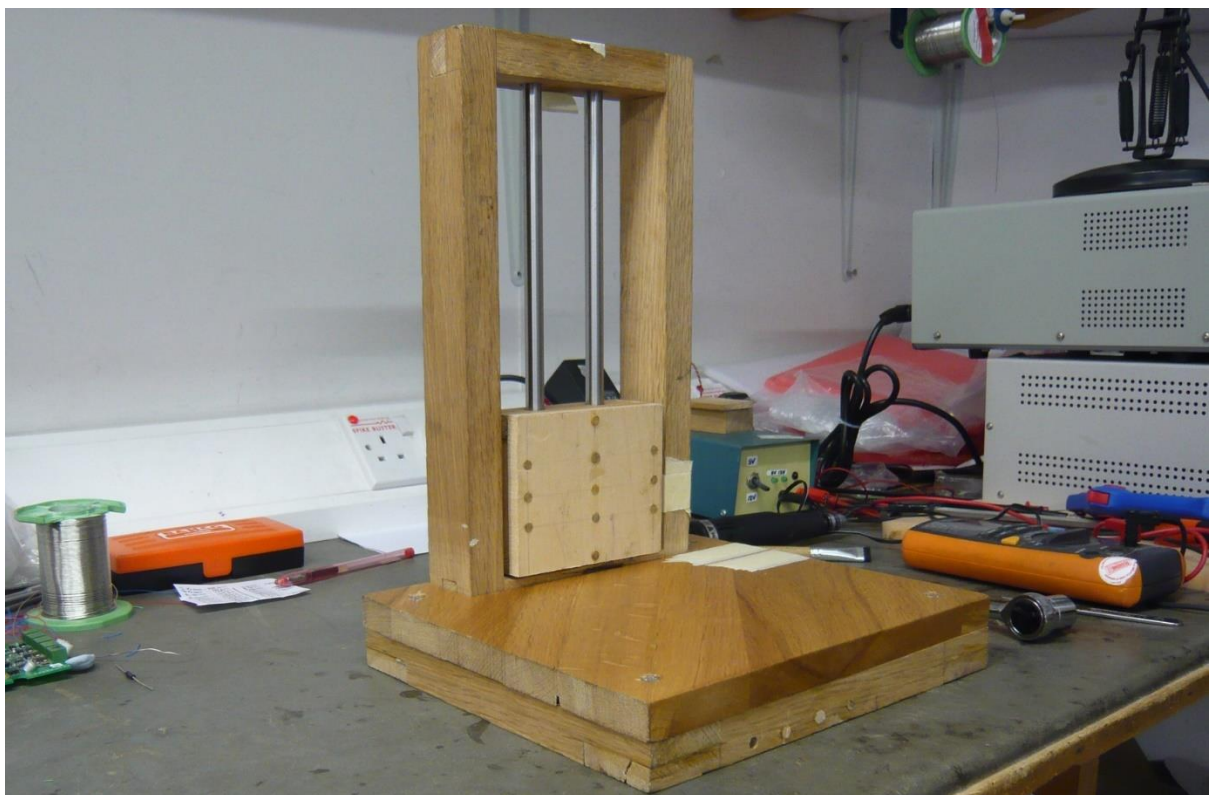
I then fastened the main frame to the base frame, using masking tape, so that two holes could be drilled for bolts to hold the frames together. A Dremel + carving bit was used to increase diameter of the holes, at top and bottom, to allow bolt & nut to be countersunk into the wood.
